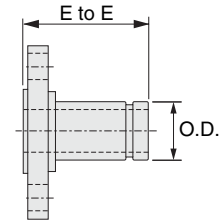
SS STAINLESS STEEL FLANGE ADAPTER
